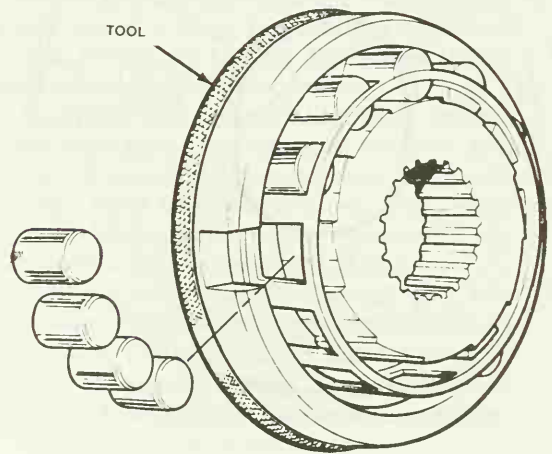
Installing rollers in overrunning clutch. (American Motors Corporation)
